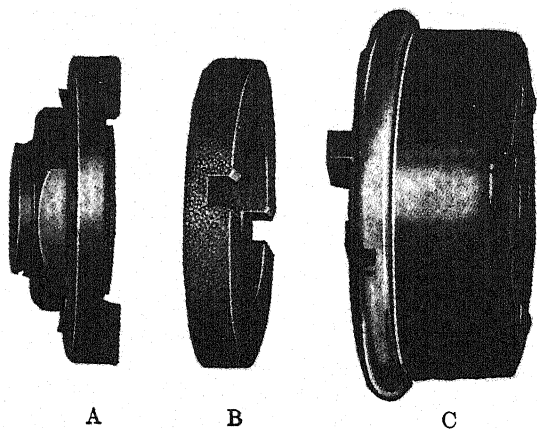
Parts of the impulse coupling. A—Driving member. B—Driving disk. C—Impulse member.
